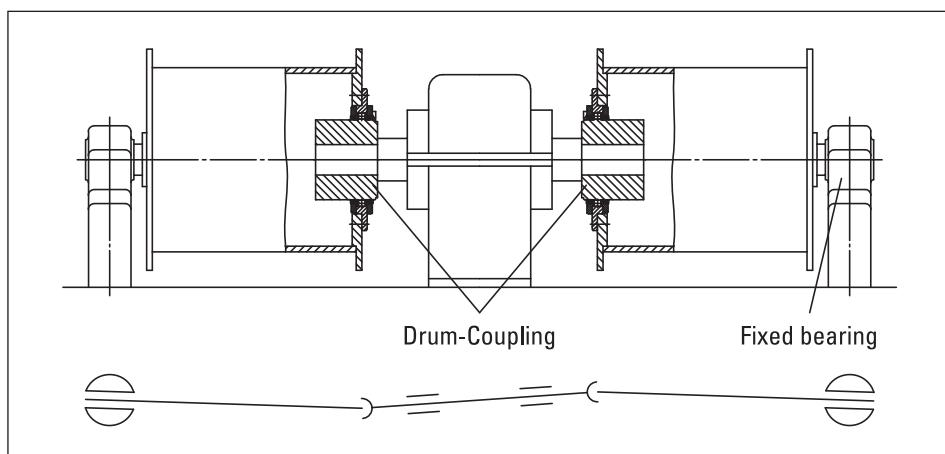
Layout of a twin-drum drive with a Drum-Coupling.
